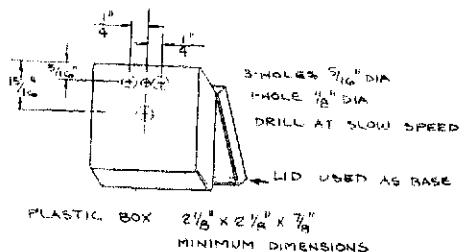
Hole locations for the crystal socket and terminal strip.
